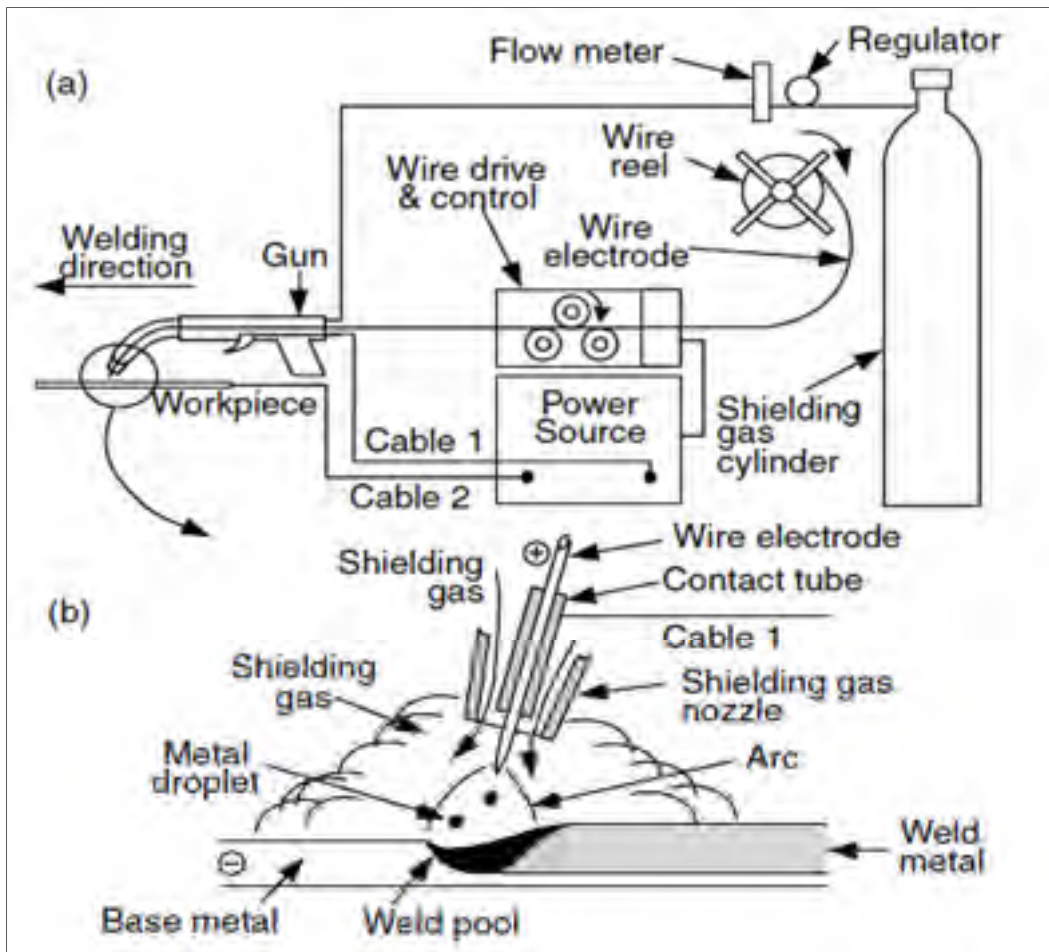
Schematic of gas metal arc welding process, a) process overall, b) fusion area [23]
